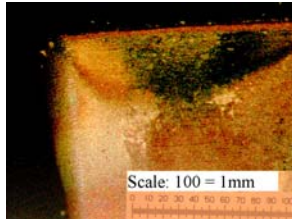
Picture showing flank wear for a air-cooled cut after 7 minutes of machining at a cutting speed of 190 m min⁻¹, and feed rate of 0.23 mm/rev with a 2 mm depth of cut
